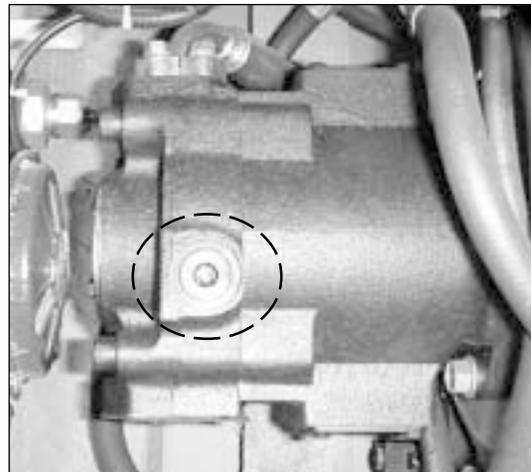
Hydraulic pump and bleeder plug used on Model 66DT machines and BP49 Power Units.
